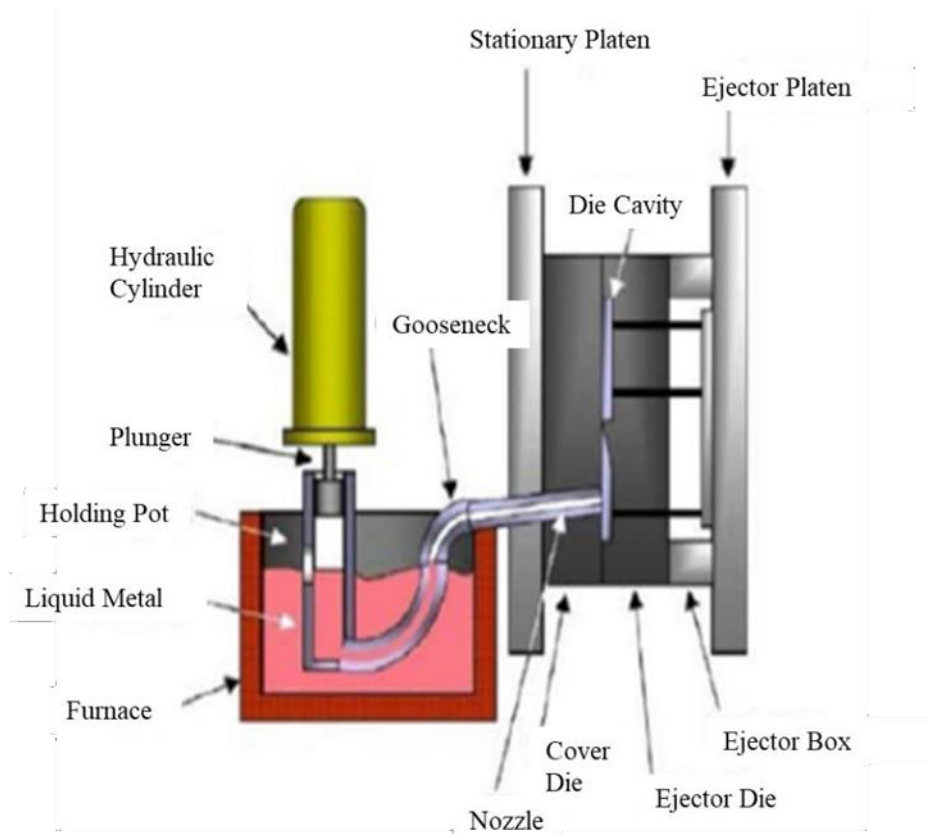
Schematic of Hot Chamber Die Casting Machine (Singh, 2016)
